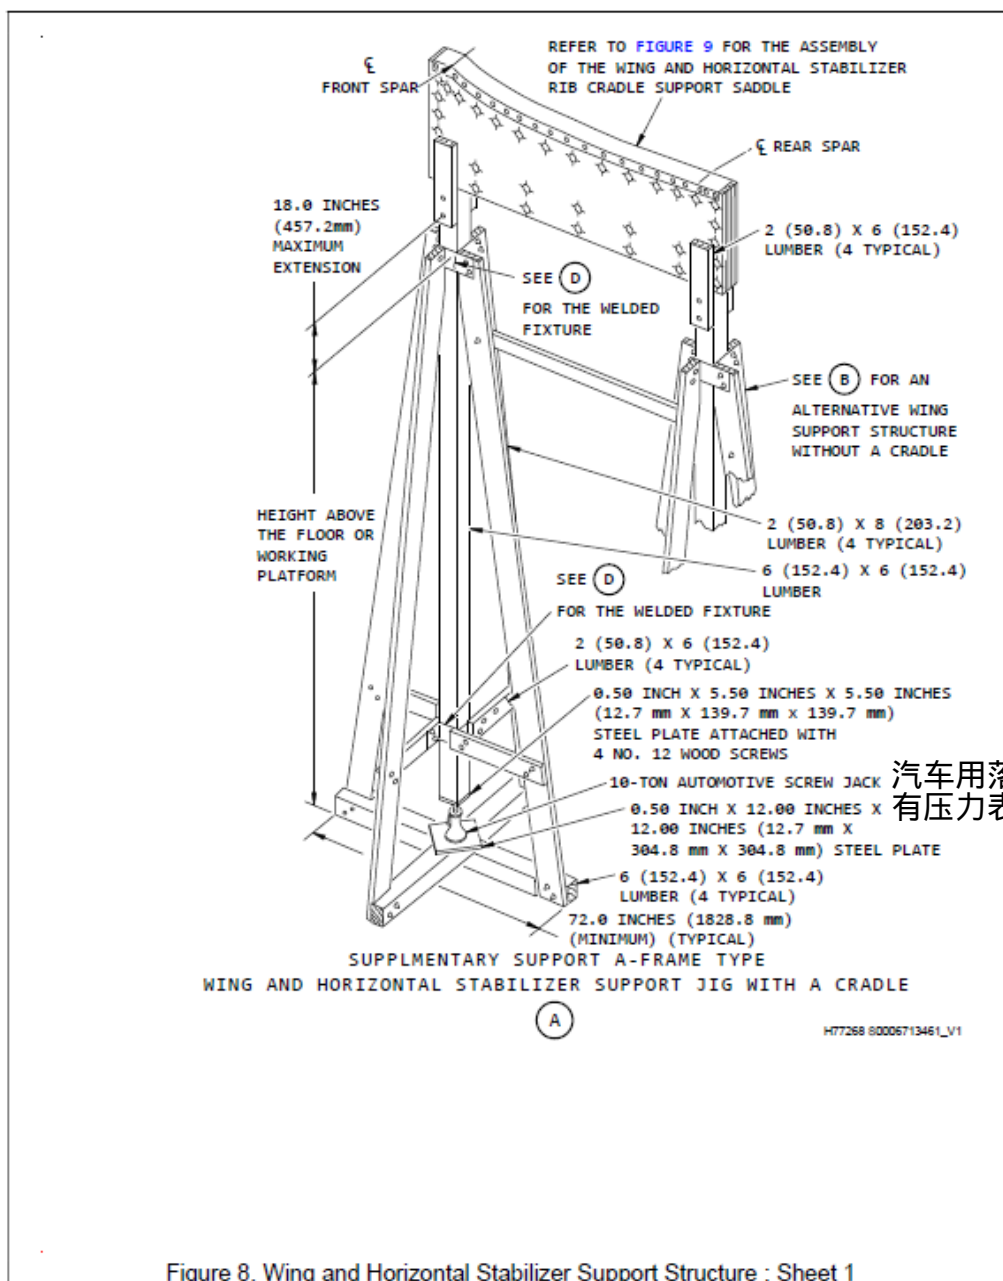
Wing and Horizontal Stabilizer Support Structure : Sheet 1
